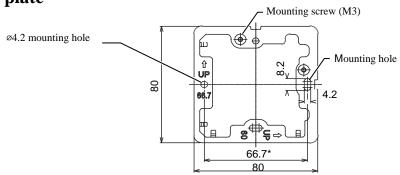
Mounting dimensions (mm): Neosensor high sensitive type with Wall-direct mounting kit
